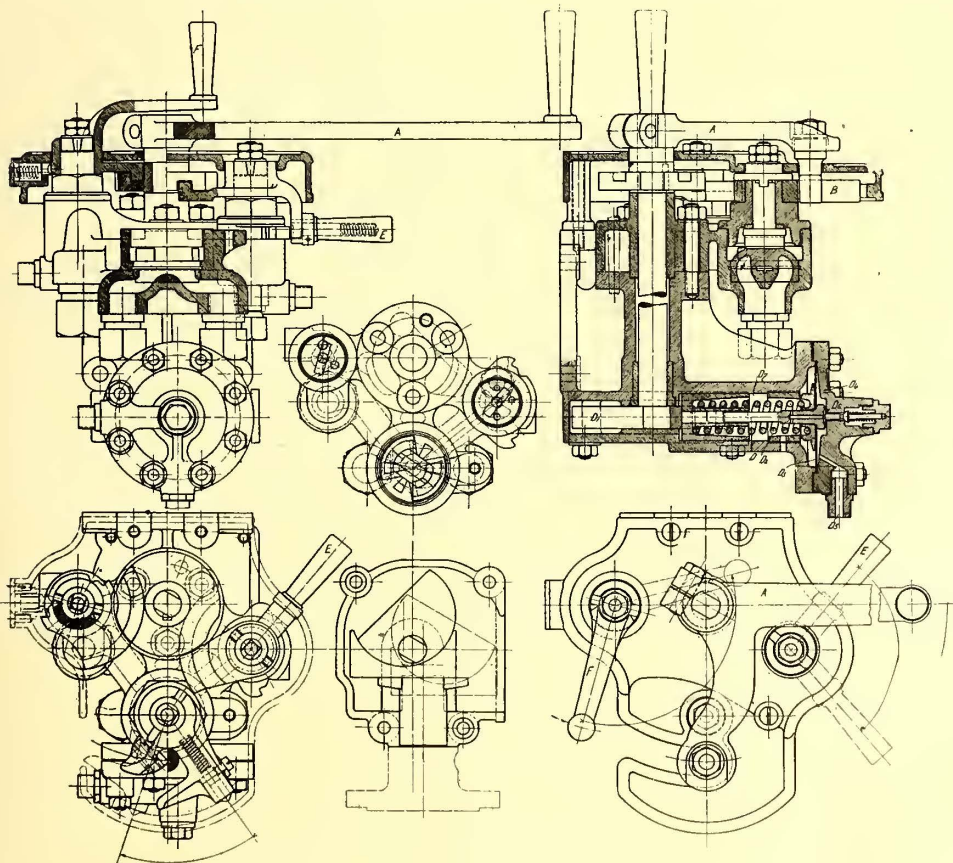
SECTIONS OF MASTER CONTROLLER
